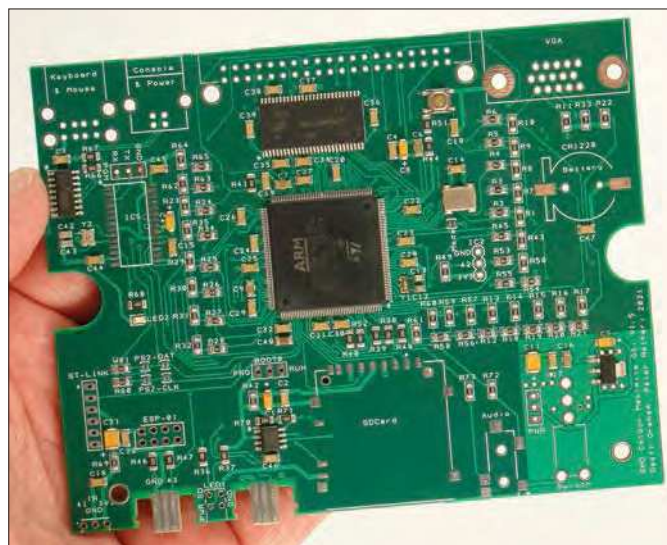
A PCB fabricator can pre-solder all the smaller SMD components, resulting in a board like this.
